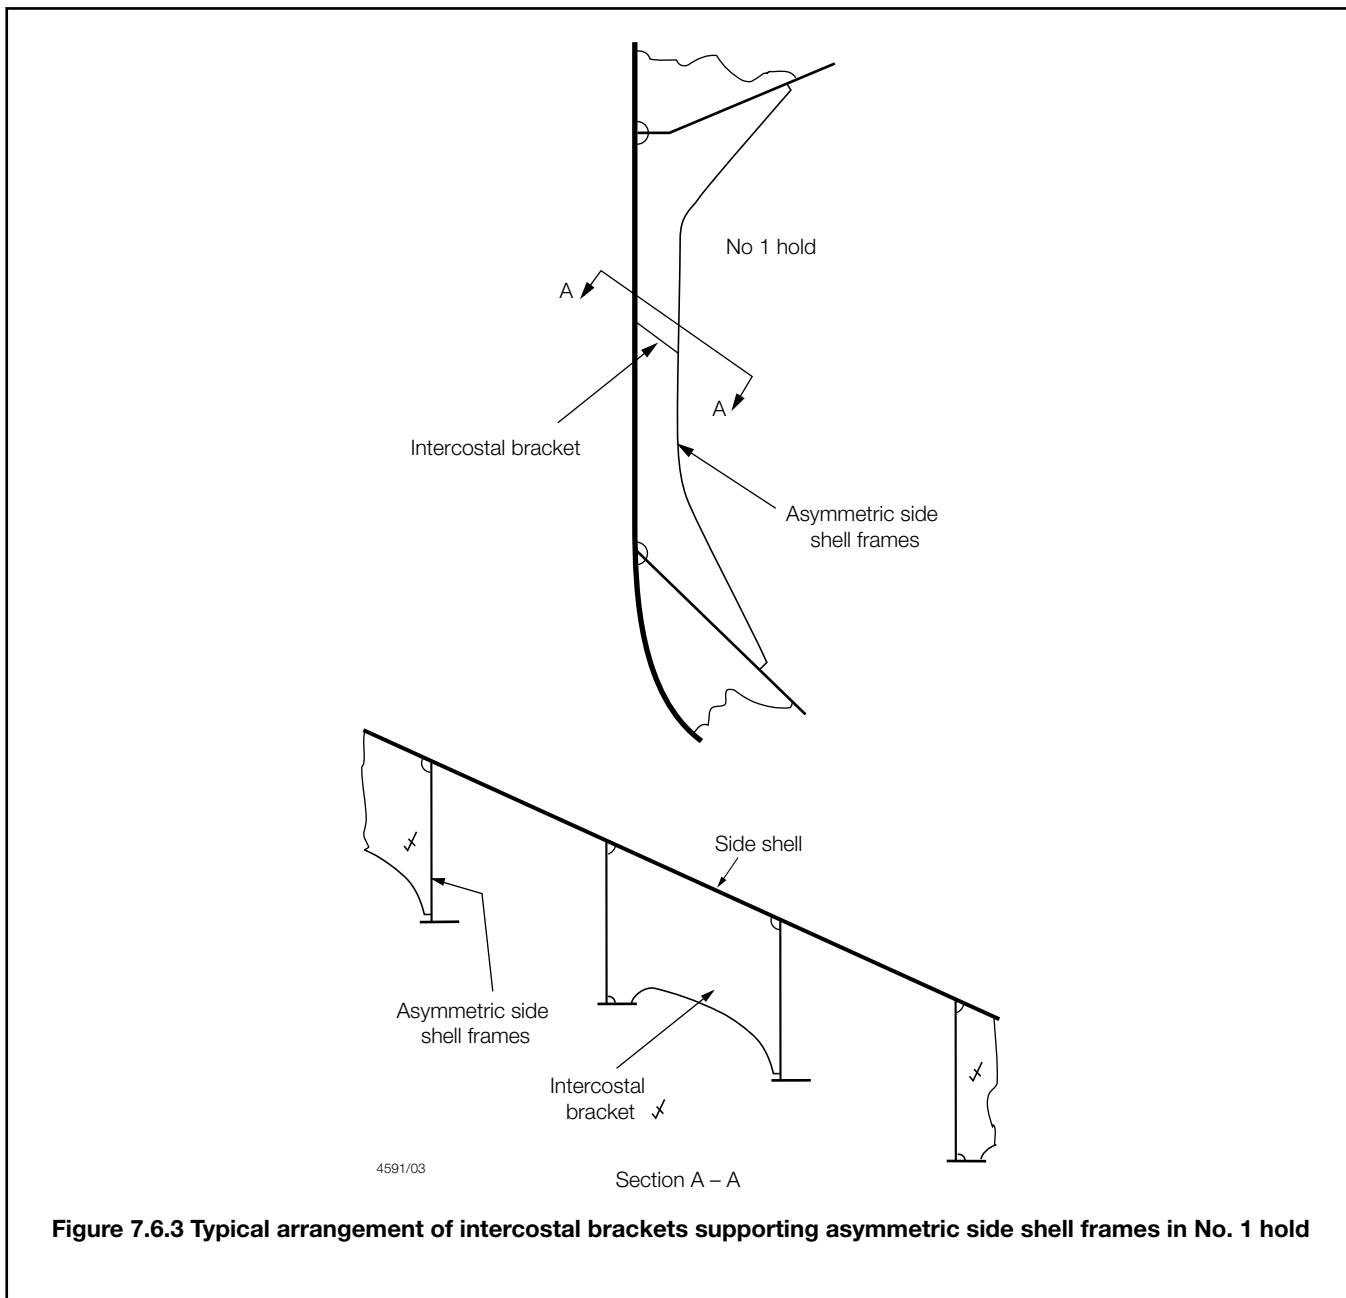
Typical arrangement of intercostal brackets supporting asymmetric side shell frames in No. 1 hold
